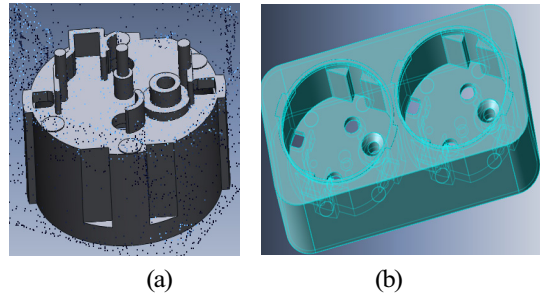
Solidified model : (a) socket inner part, (b) cover part
